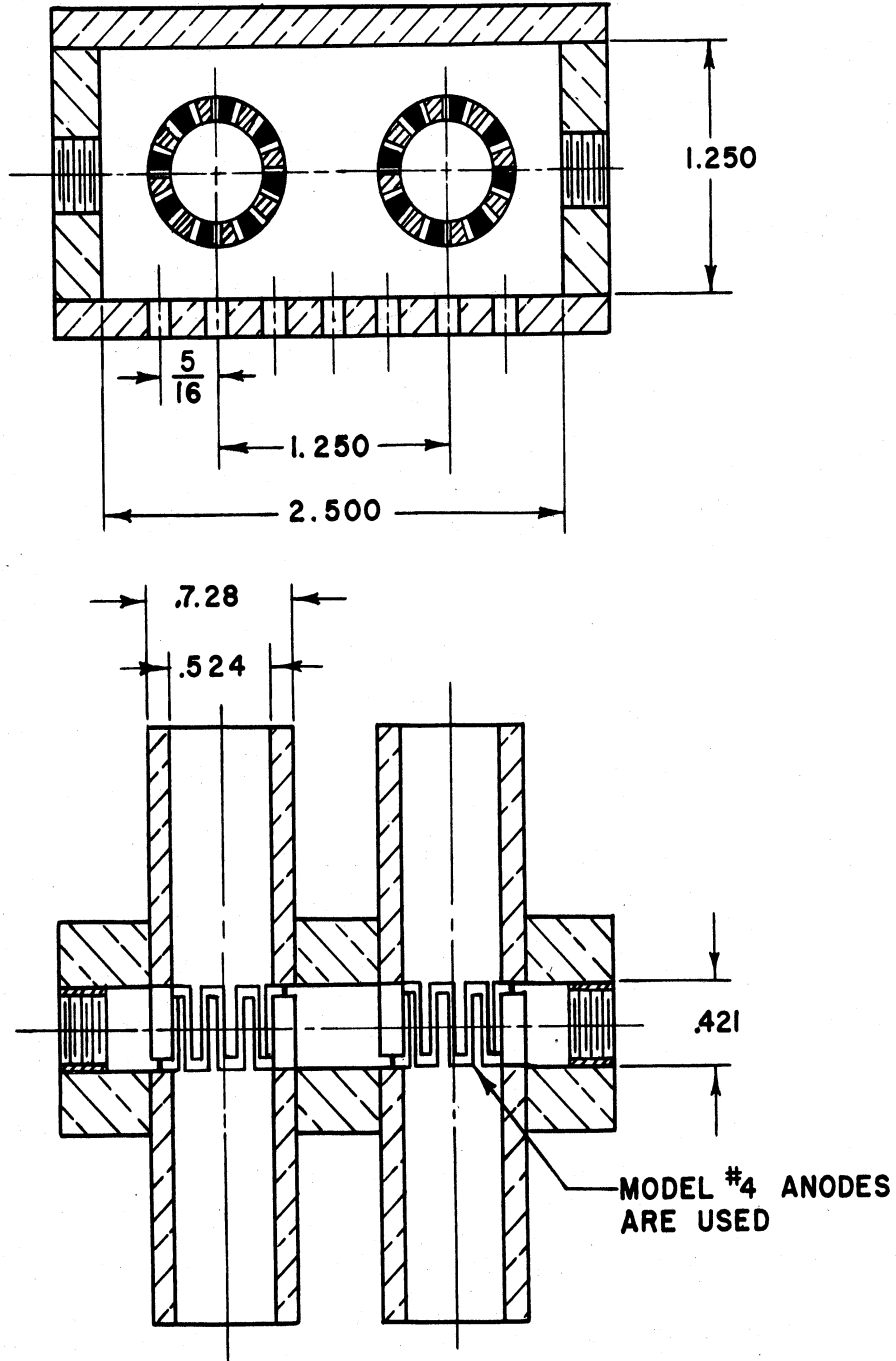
SKETCH OF MODEL #8 MAGNETRON USED FOR COLD TEST
